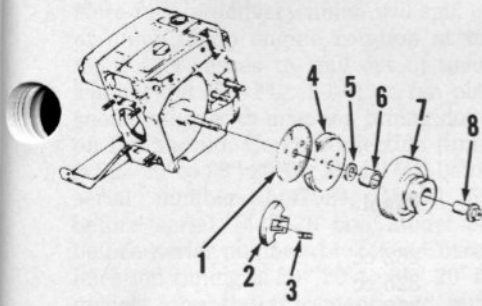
Exploded view of clutch used on Model XL98A Multi-Purpose Saw.
